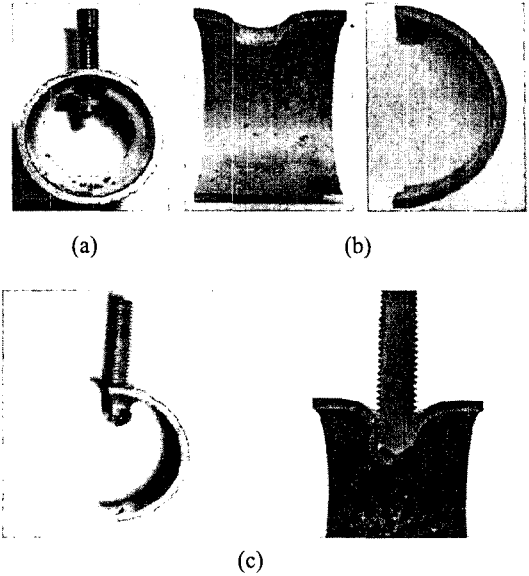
(a) Hydro-embedded tubes, (b) sectioned tubes for measuring flange depth, and (c) sectioned connection element to investigate degree of contact with flange
